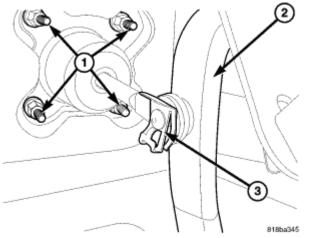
Identifying Retainer Clip, Pedal & Booster Mounting Nuts Courtesy of CHRYSLER LLC
